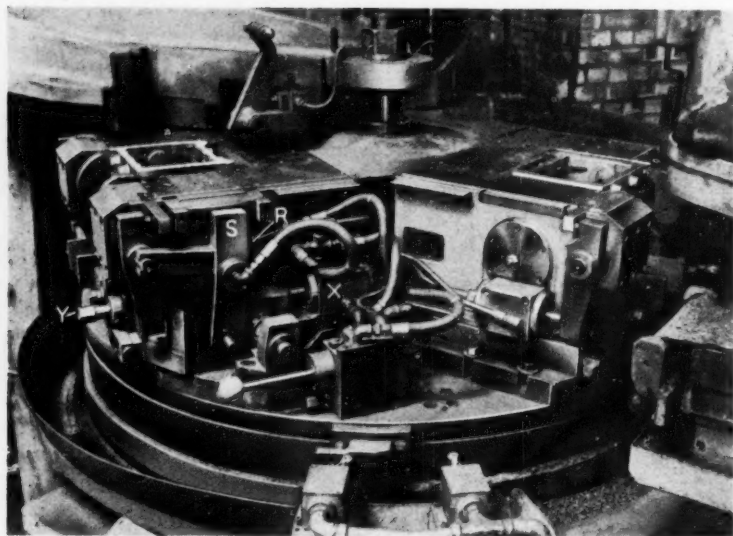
In this View of the Fixture on the Machine in Fig. 5, the Guards have been Removed so that Details of the Hydraulically-operated Clamping Mechanisms May be Seen
